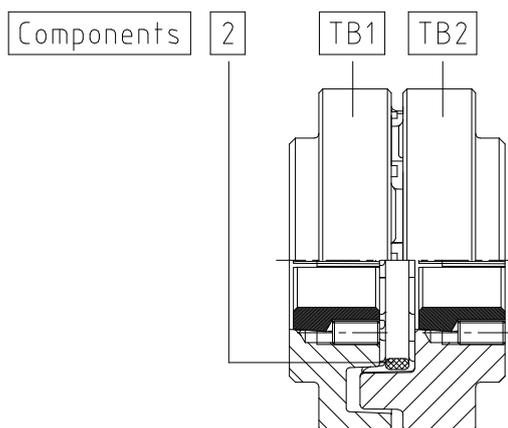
Type with taper clamping sleeve hub design TB1 and TB2
